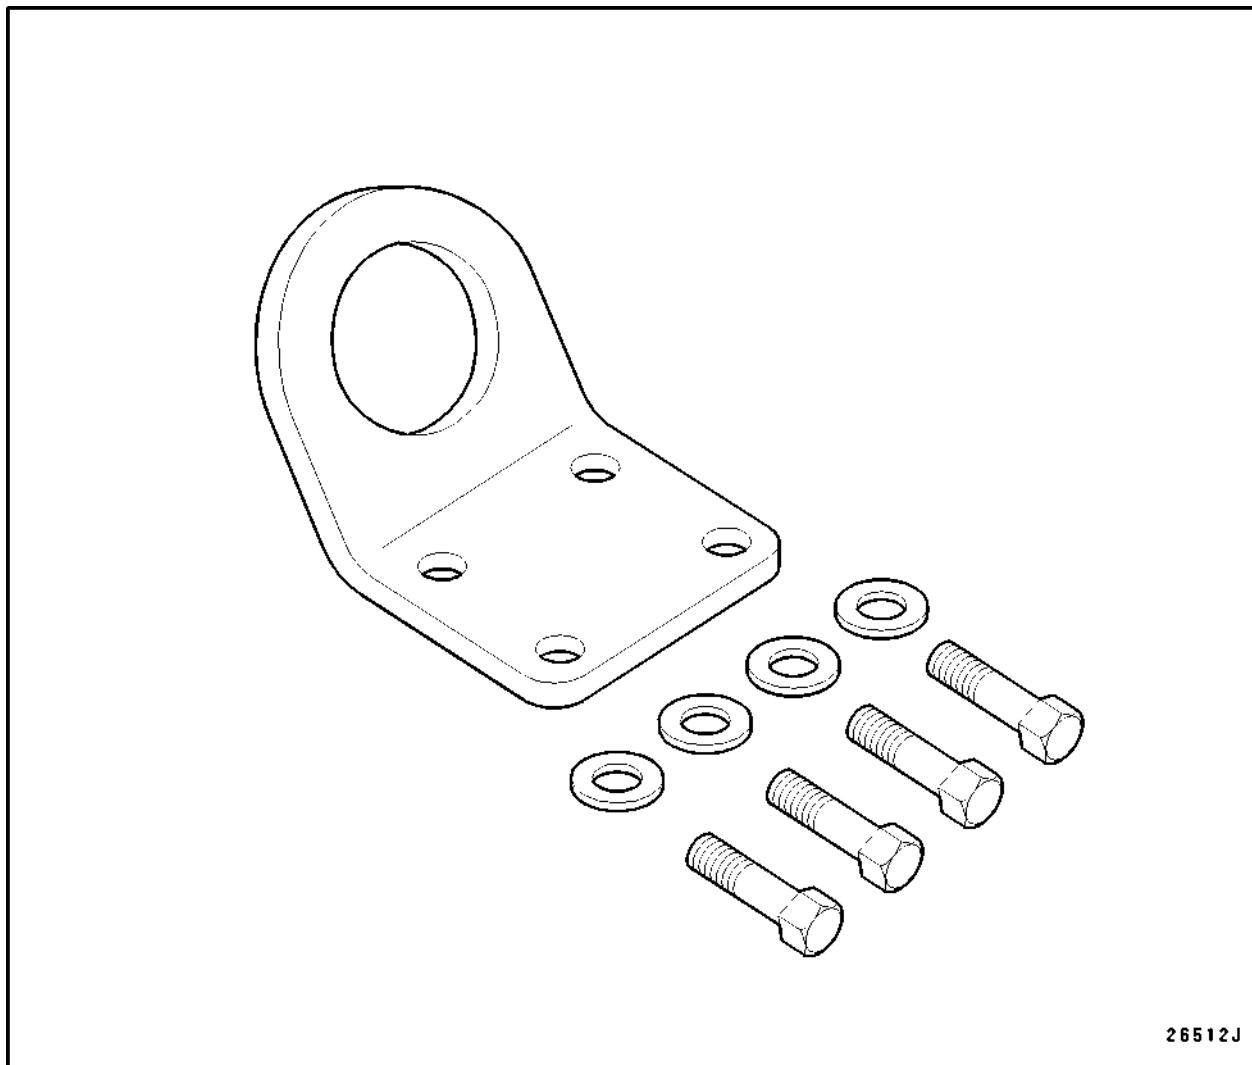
Cylinder Head Lifter Bracket,J 41823
